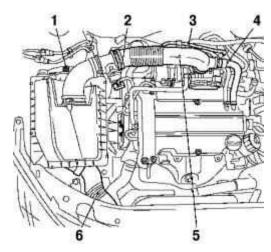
Components, shooting in the dismantling of the air filter: 1 - screw fixing the lower rubber support, 2 - wiring harness mass air flow sensor, and 3 - line of ventilation of the fuel tank, 4 - hose, ventilation motor, 5 - air intake hose, 6 - inlet pipe
